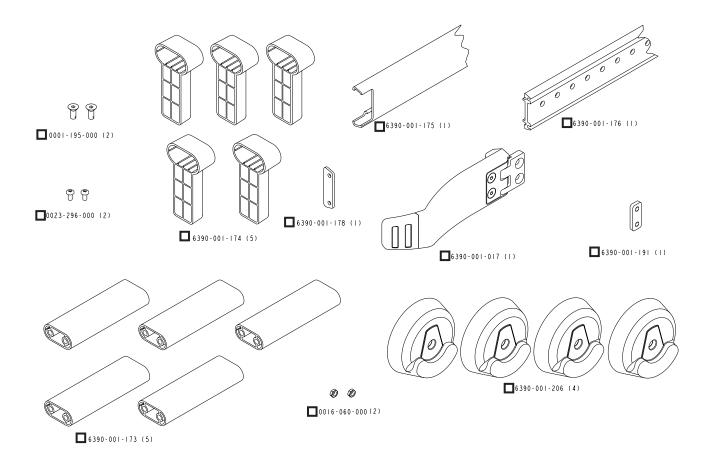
Optional Wheel Guide Assembly Installation Kit Components (6390-027-000)
